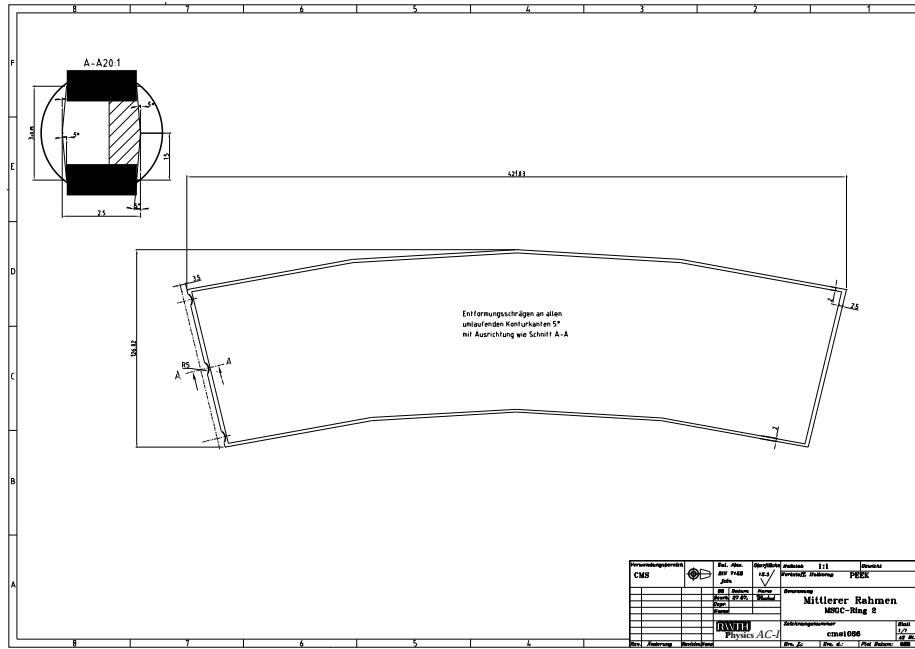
Technical drawing of the spacer frames of an mf2 module.
